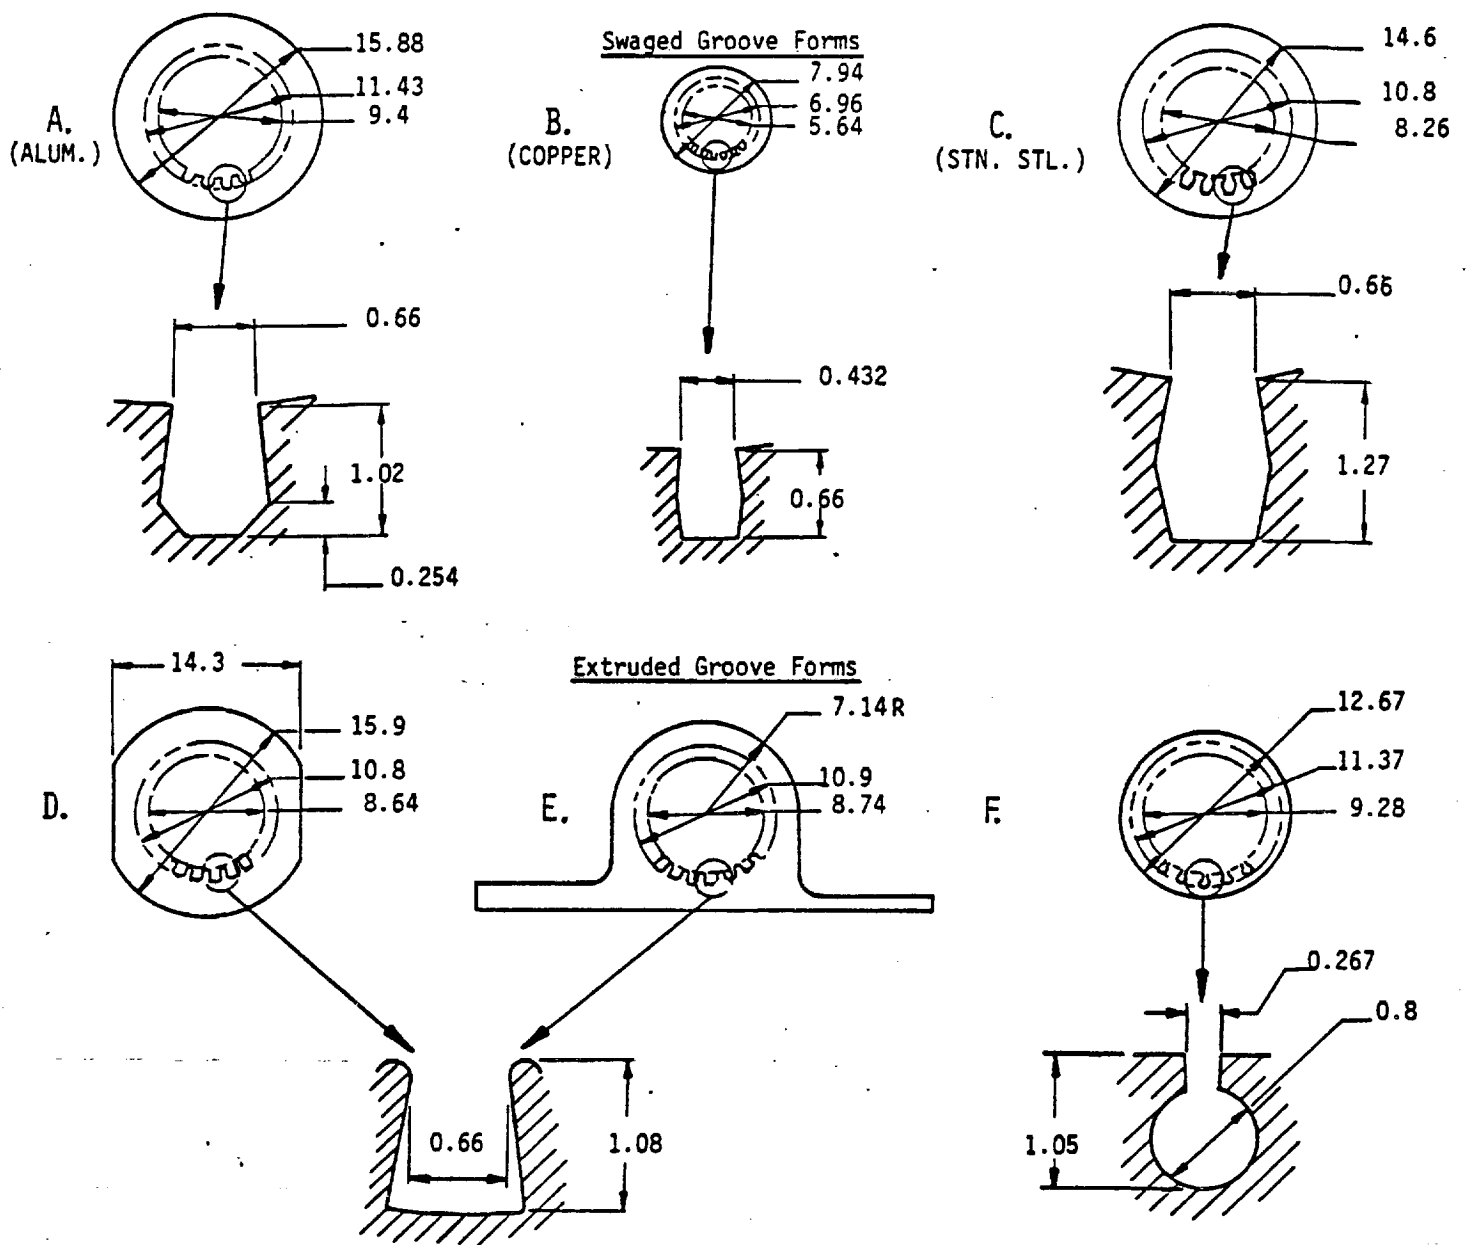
Typical axially grooved heat pipe designs (Dimensions in. mm)
